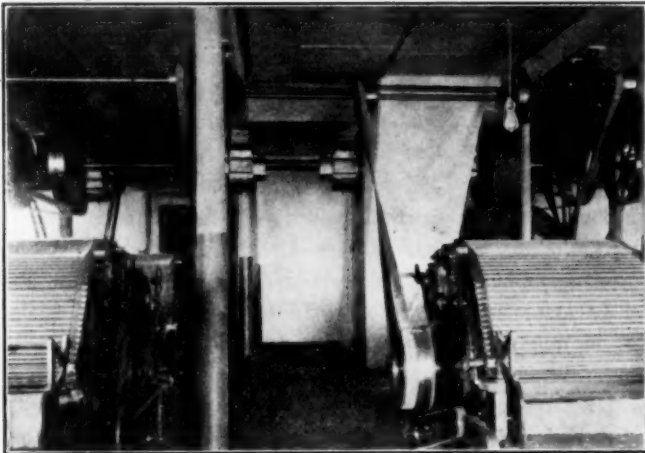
CARD ROOM, THIRD STORY. END VIEW OF BELT ENCLOSURE. BEARINGS ALL OUTSIDE
